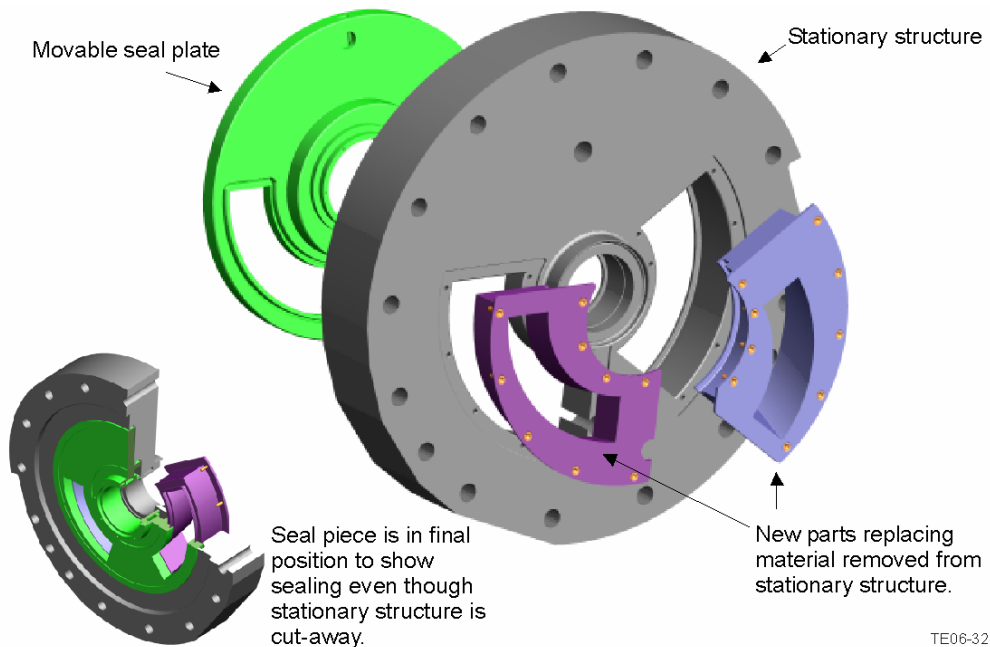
Strip Seal Concept Applied to the SE-17 Rig Parts.
